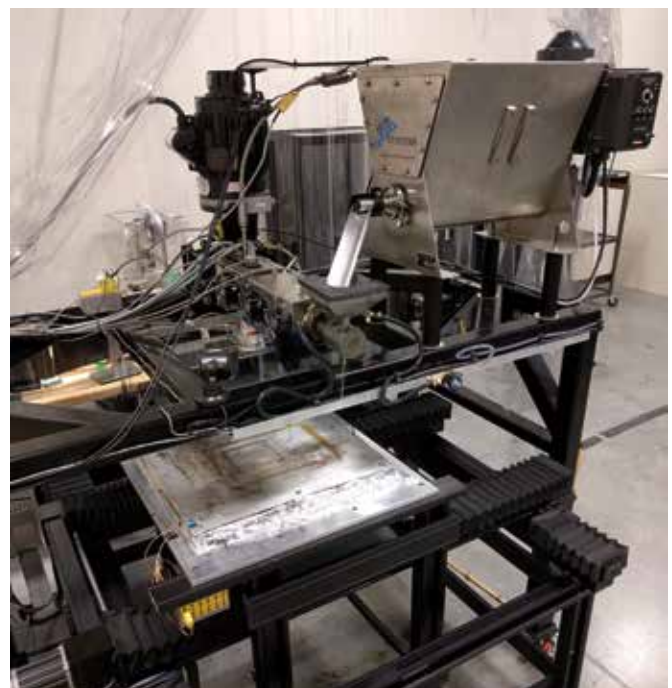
The CAMRI system in action. Note the movable X-Y-Z axes platform beneath, on which the 3D printed parts are constructed.
